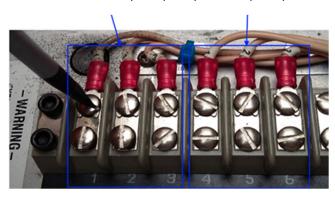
Install the Dual Micro Switch Assembly and Wires
